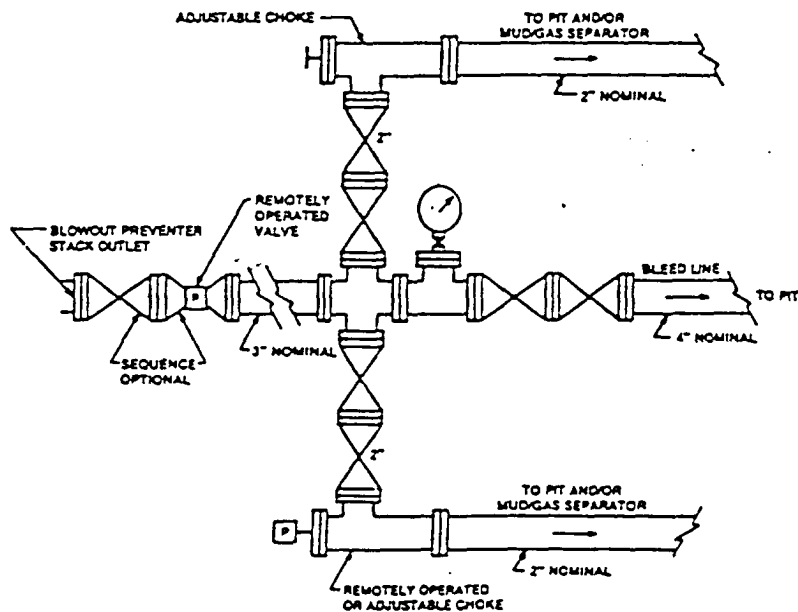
Typical choke manifold assembly for 5M rated working pressure service — surface installation.
